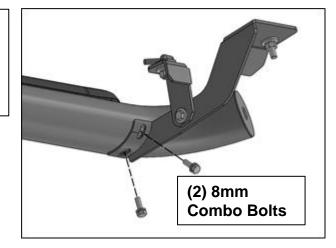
Attach the Driver/Left Rear Mounting Bracket to the Bolt Plate
